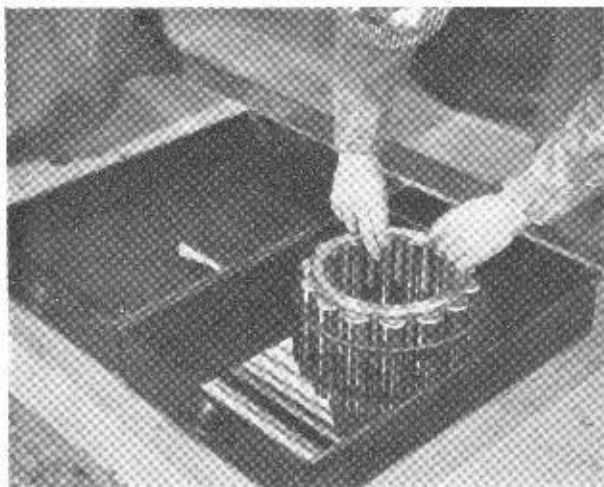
Bearing roller assembly being placed in shallow pan preparatory to cleaning.
